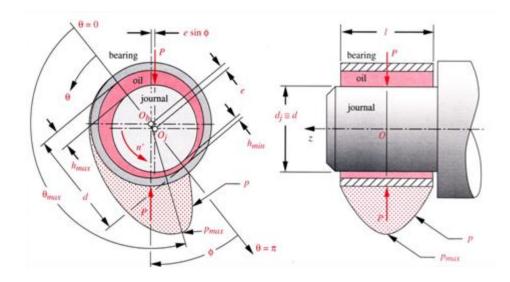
A rotating shaft, metal contact and the acting forces. (Source: Shigley's Mechanical Engineering Design, 8th Edition, Budyass Nisbett)
